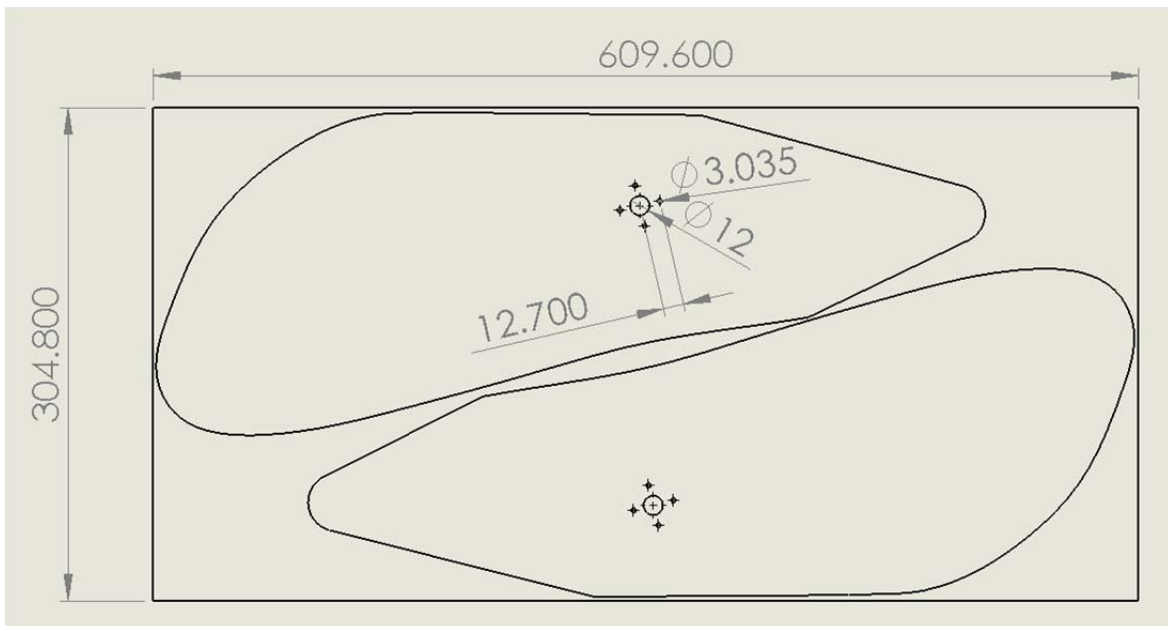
End-plate design used by Advanced Laser & Waterjet Cutting for the end-plates. Dimensions are in mm.
